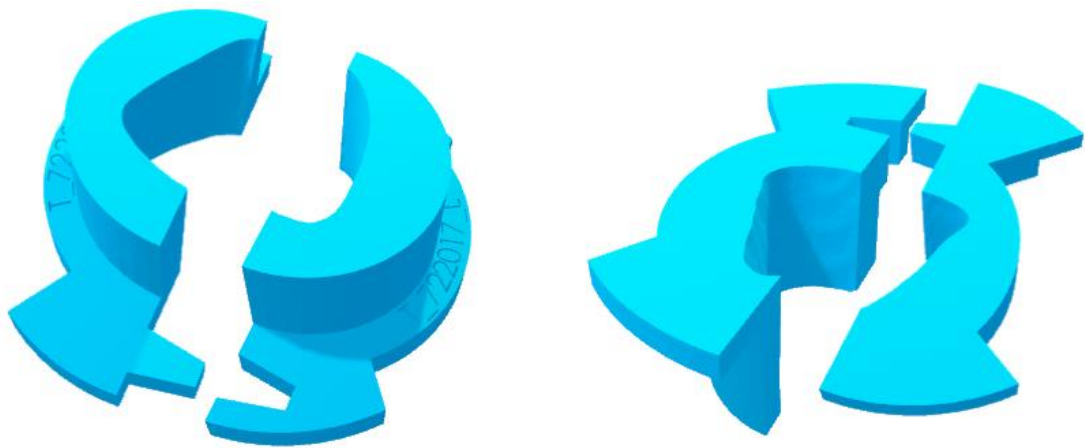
Final lower and upper Alignment Tibia Guide.
